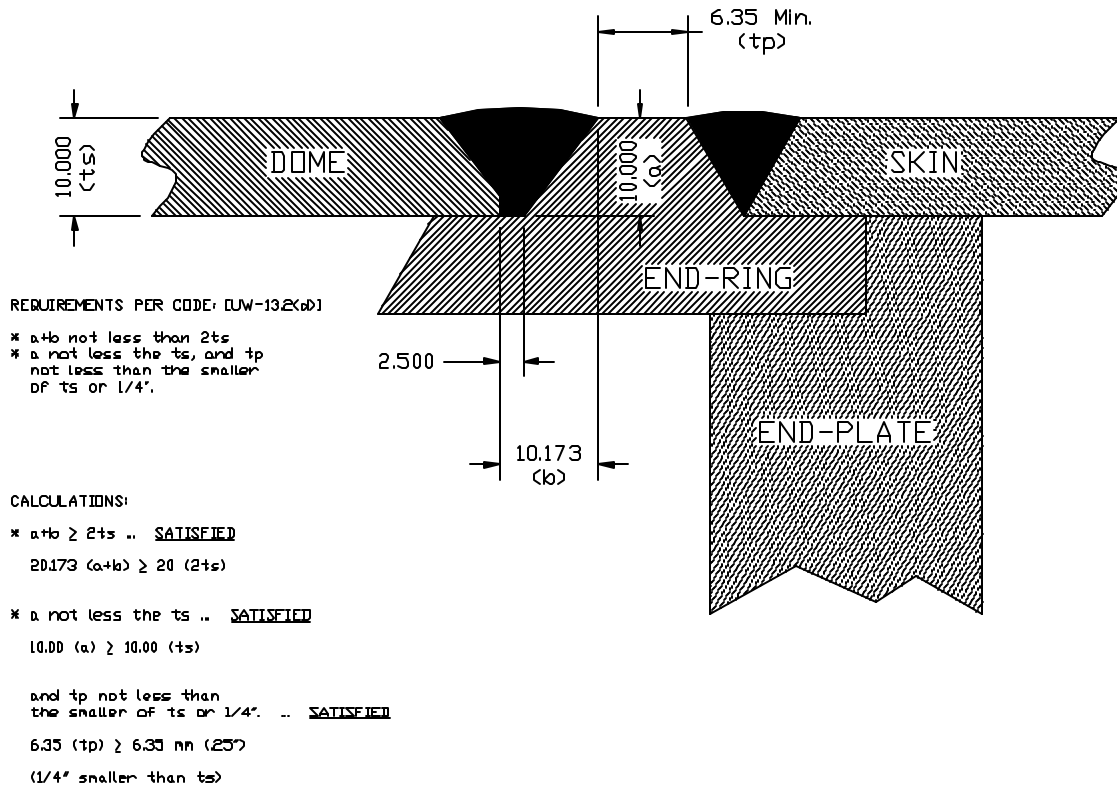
Detail of cold mass skin to end plate weld.
